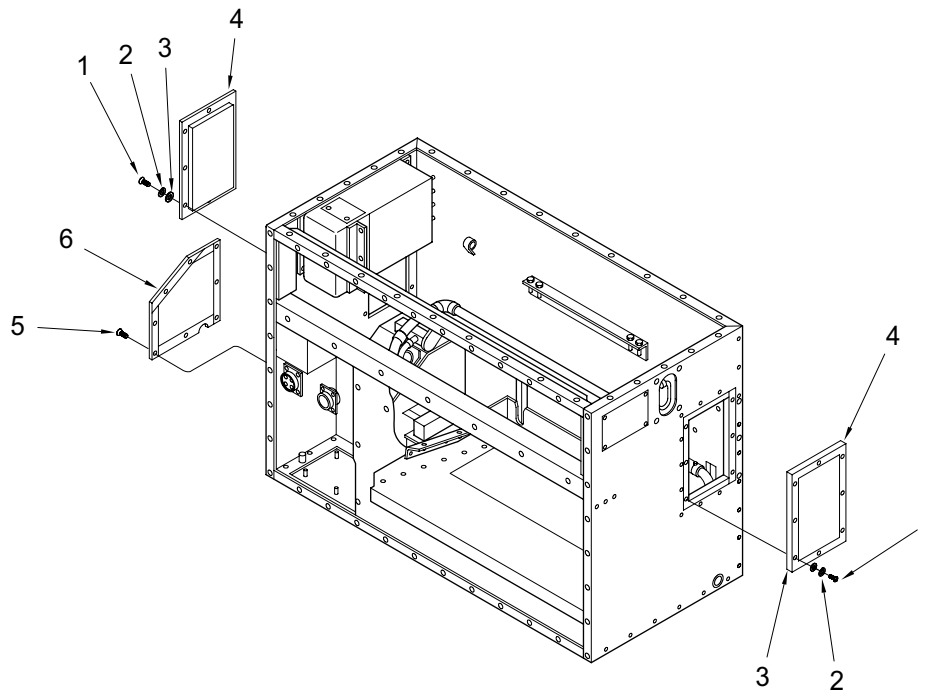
EVAPORATOR ACCESS AND FRESH AIR COVERS.
